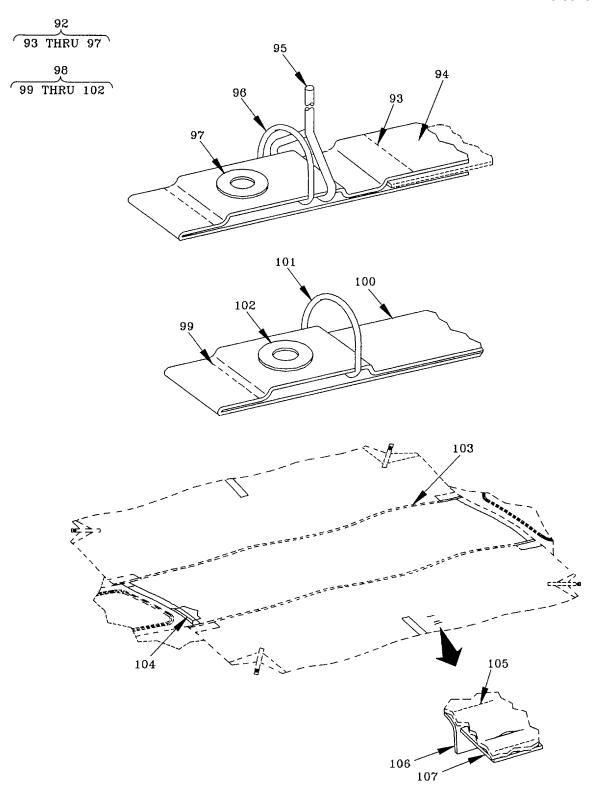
Tent Body Assembly (Sheet 7 of 7)
